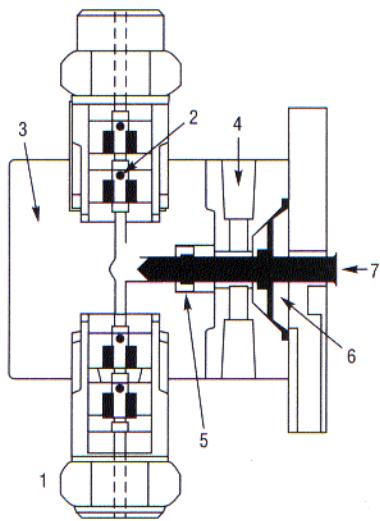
Schematic showing a flushing passage behind the main pump seal. 1 = inlet check valve, 2 = ball in outlet check valve, 3 = pump head, 4 = flushing passage, 5 = main seal, 6 = flushing seal, 7 = piston. (Reprinted courtesy of reference 1.)
